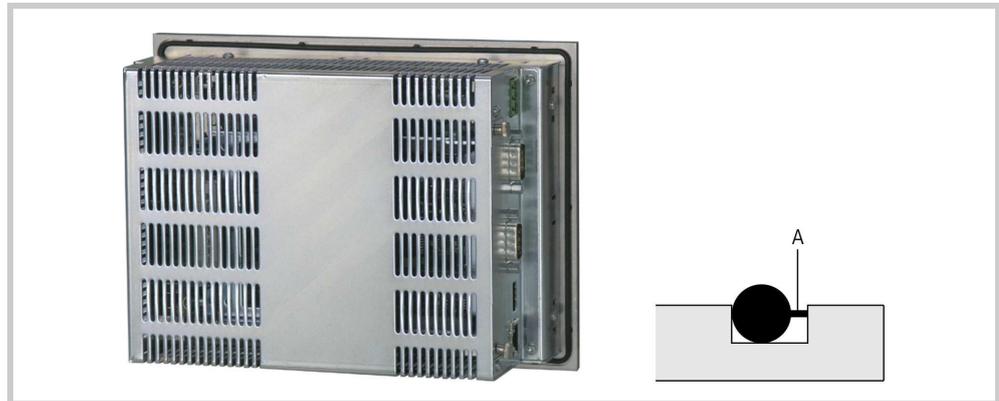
Seal fitted (detail shows optimum position of a securing tab (A))
